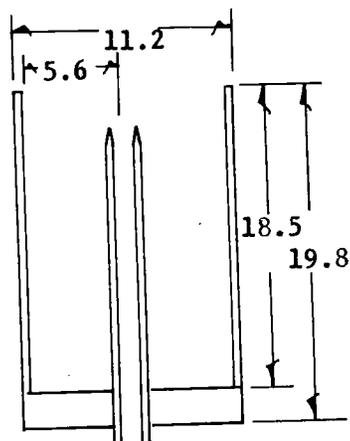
External Constant Head Tank (E) (all dimensions in cm)
